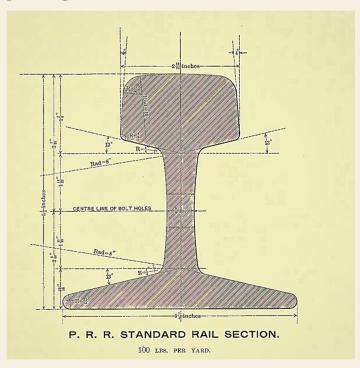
Representative Flat Bottom Rail Cross Section Drawing Pennsylvania Railroad
